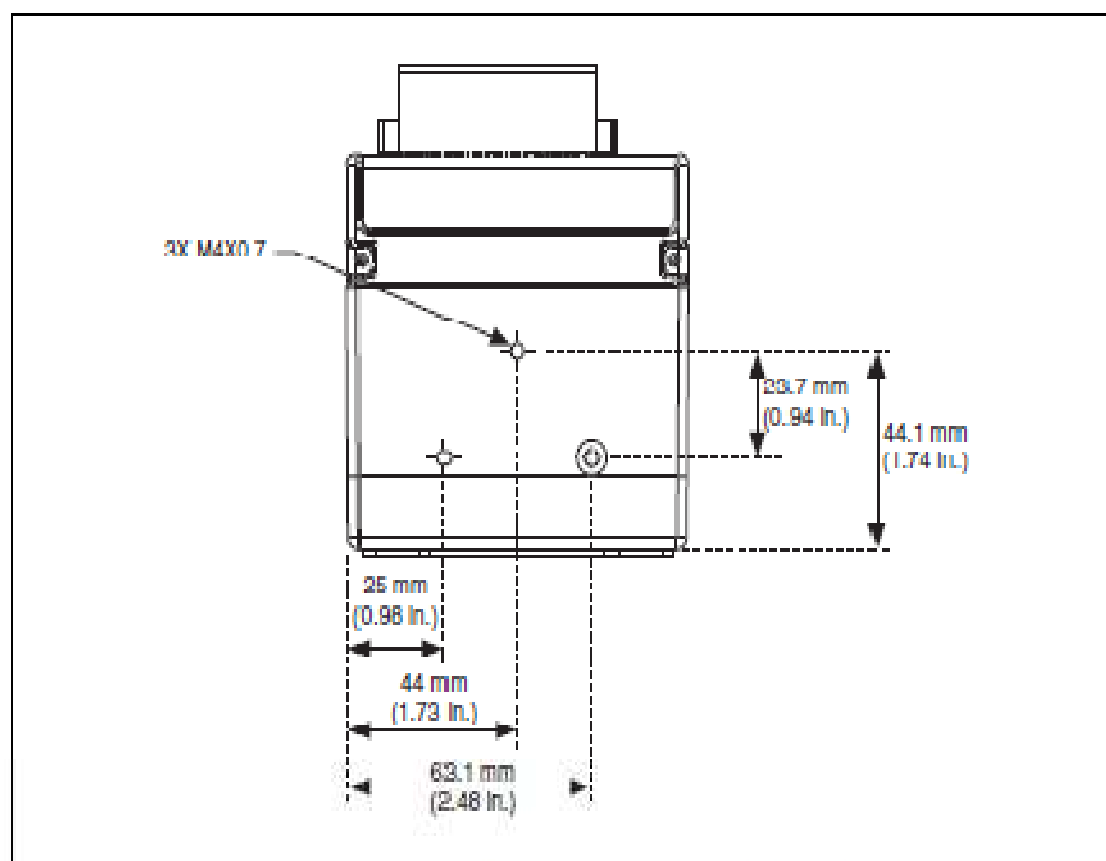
cRIO-9072/3/4, Side View with Dimensions
